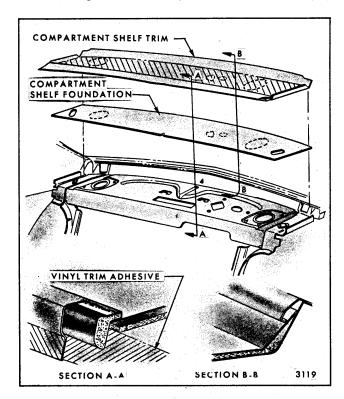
Compartment Shelf Trim Panel – Typical All Less "E and Z" Styles
